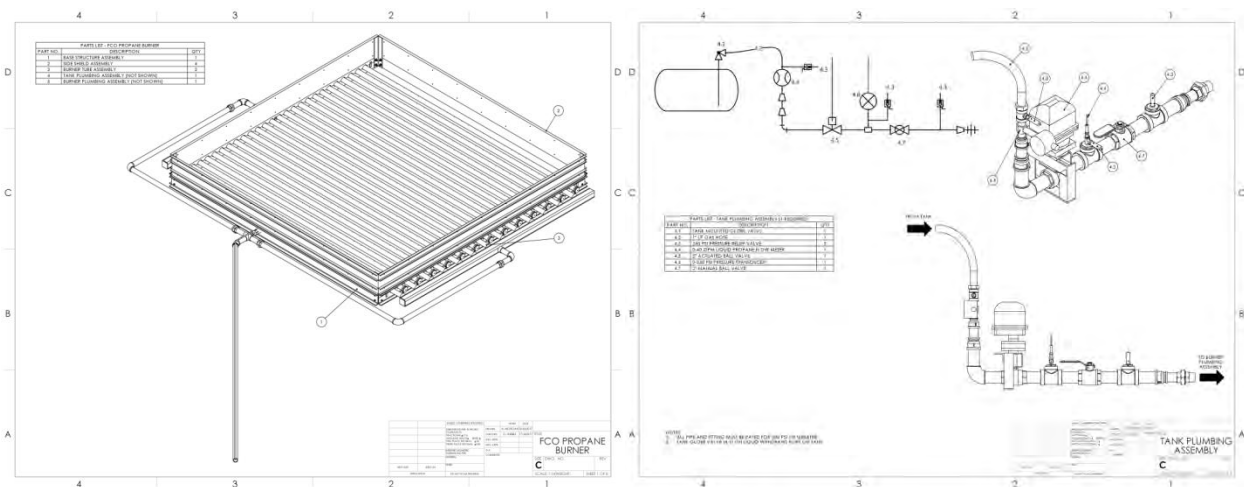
Dahlgren propane burner and propane burner tank piping assembly
